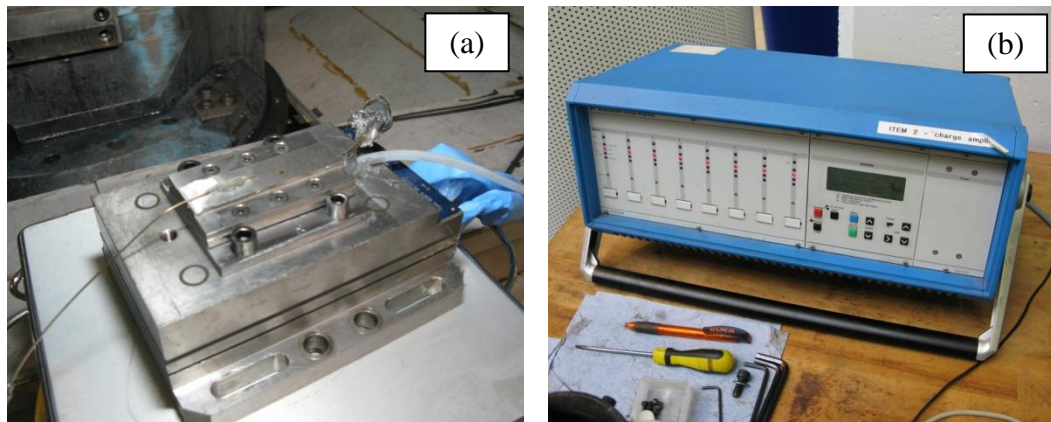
Force measurement equipment; (a) Kistler 9257A dynamometer with test piece assembly mounted, (b) Kistler 5017 Charge Amplifier utilised in force measurement.
